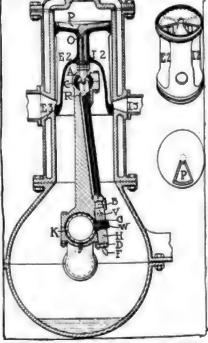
THORNLEY ROTARY VALVE MOTOR
